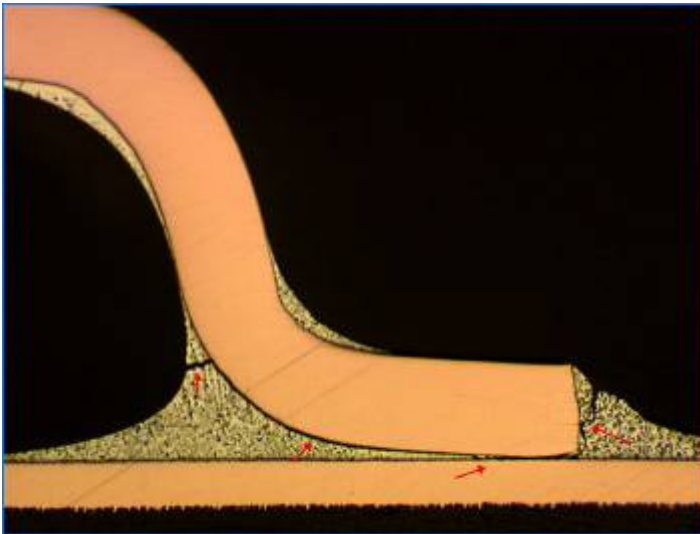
cross section, SN68, U31, right lead solder crack, 100x
